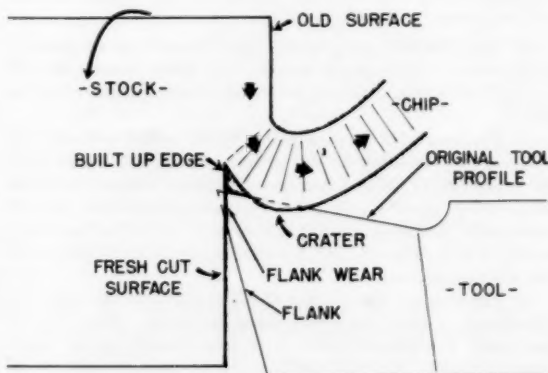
MECHANISMS OF METAL CUTTING AND TOOL WEAR
